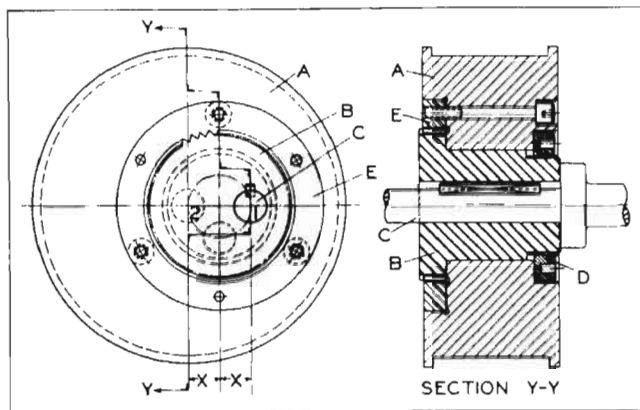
In this drive, throw of outer eccentric *A* is adjusted by rotating sleeve *B* carrying drive-shaft *C*.
